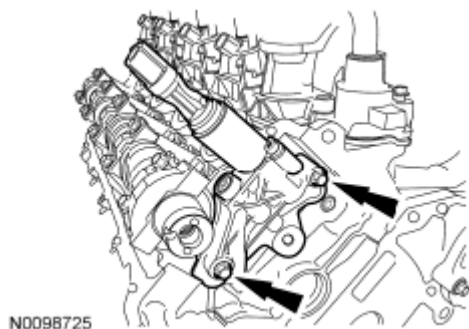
Locating RH Variable Camshaft Timing Housing And Bolts
